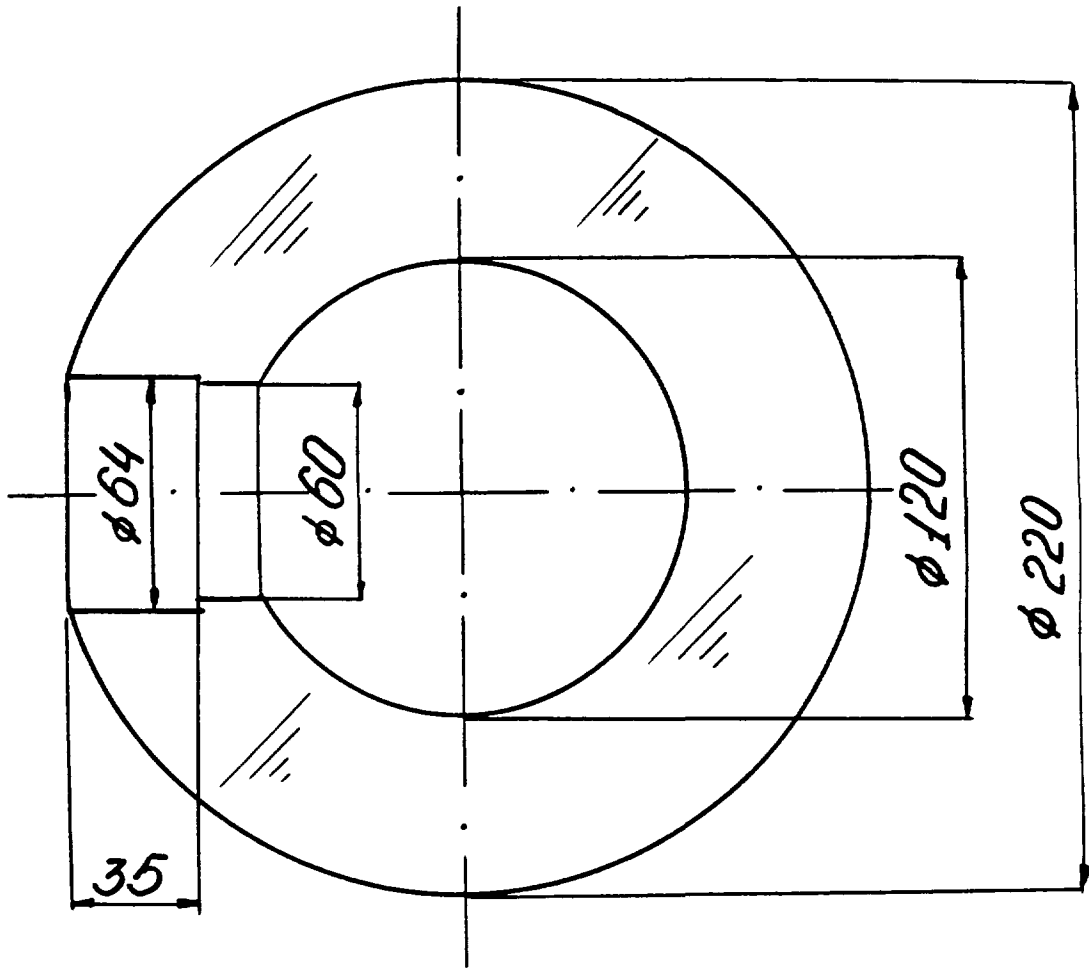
Geometry of Be assembly (sizes are given in millimeters).
